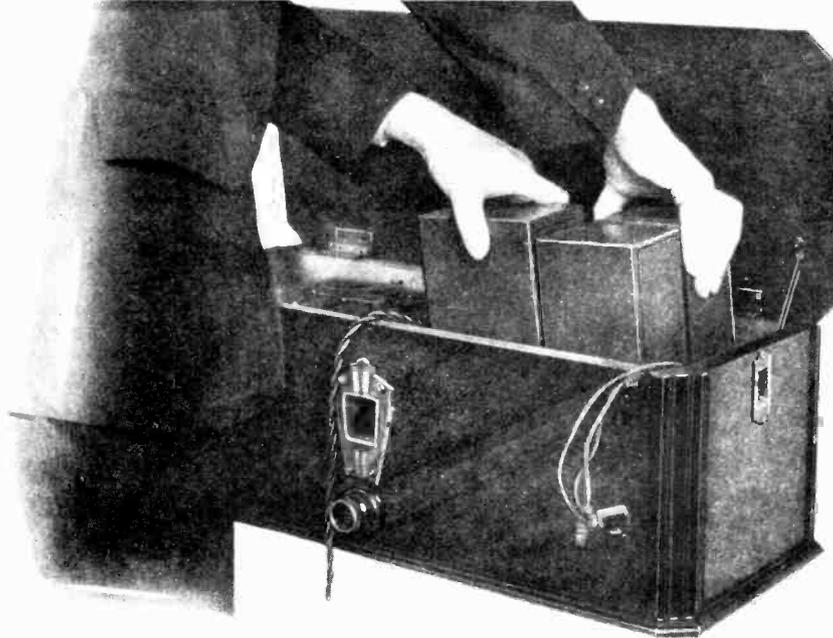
Removing Radiola 44 receiver assembly from cabinet
